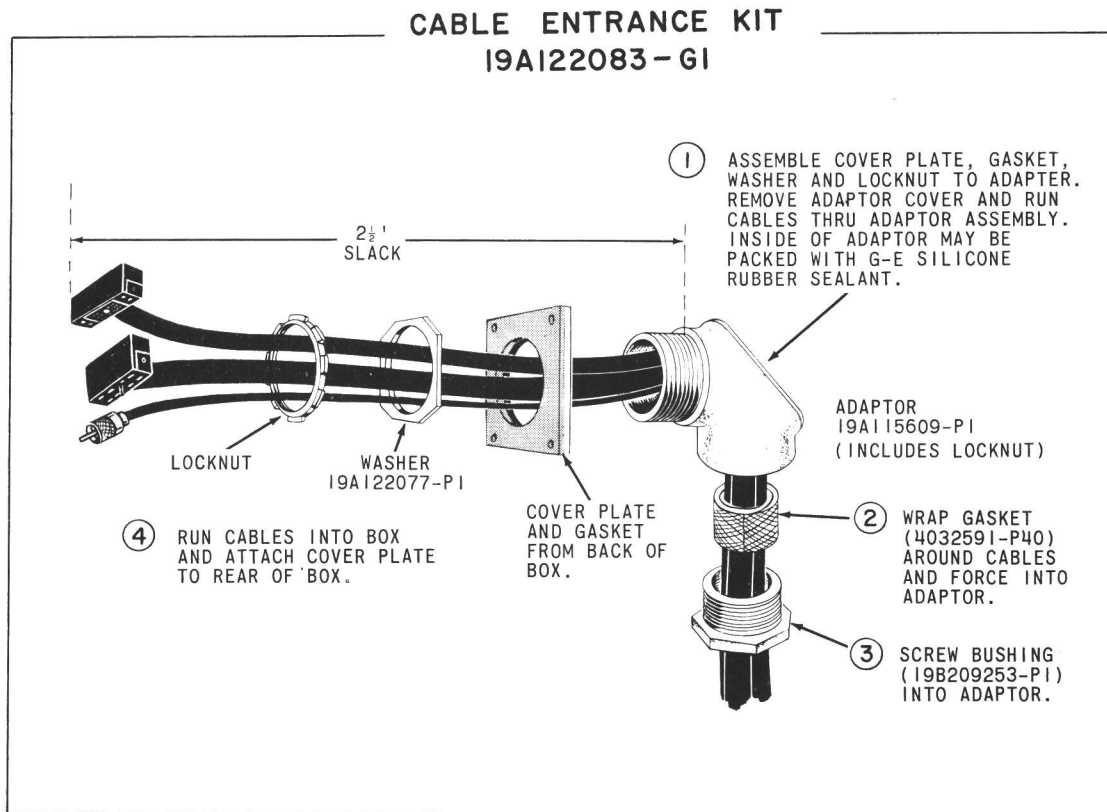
Assembling Cable Entrance Kit 19A122083-G1
